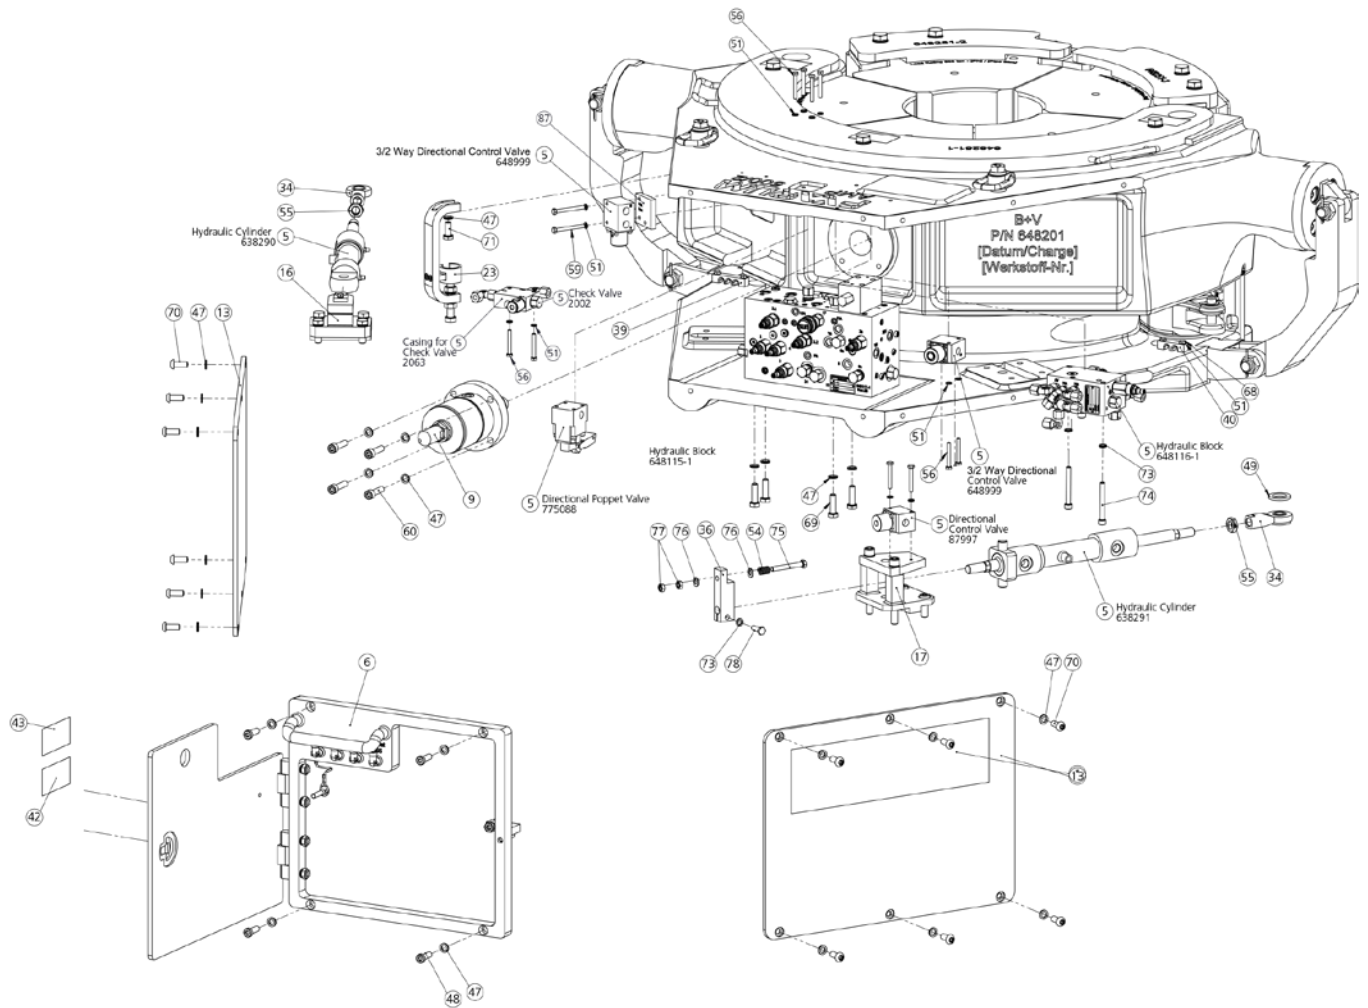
648200-Y AMP®-500/2 Drawing II
